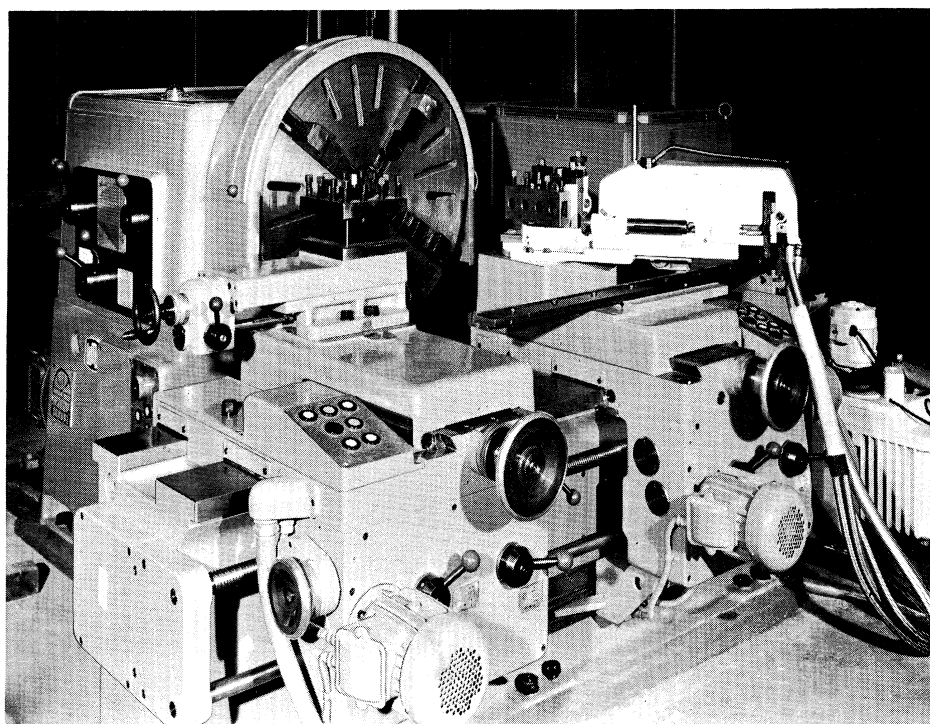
German Facing Lathe. 25 hp stepless spindle drive. Swing 24 to 50 in., rapid traverse 90 ipm.
